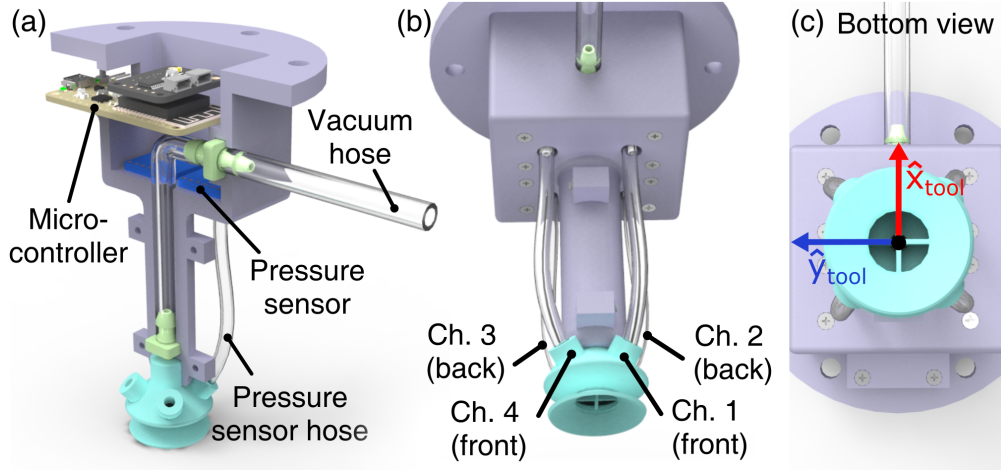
CAD images for the suction cup system. (a) Sectional view of the system showing four pressure sensors and a microcontroller for data acquisition. Assembled system showing vacuum hose and pressure sensor hoses. (b) Configuration of four channels and the coordinate of tool frame. (c) Axes are aligning with the inner chamber’s walls, as illustrated in the bottom view.
